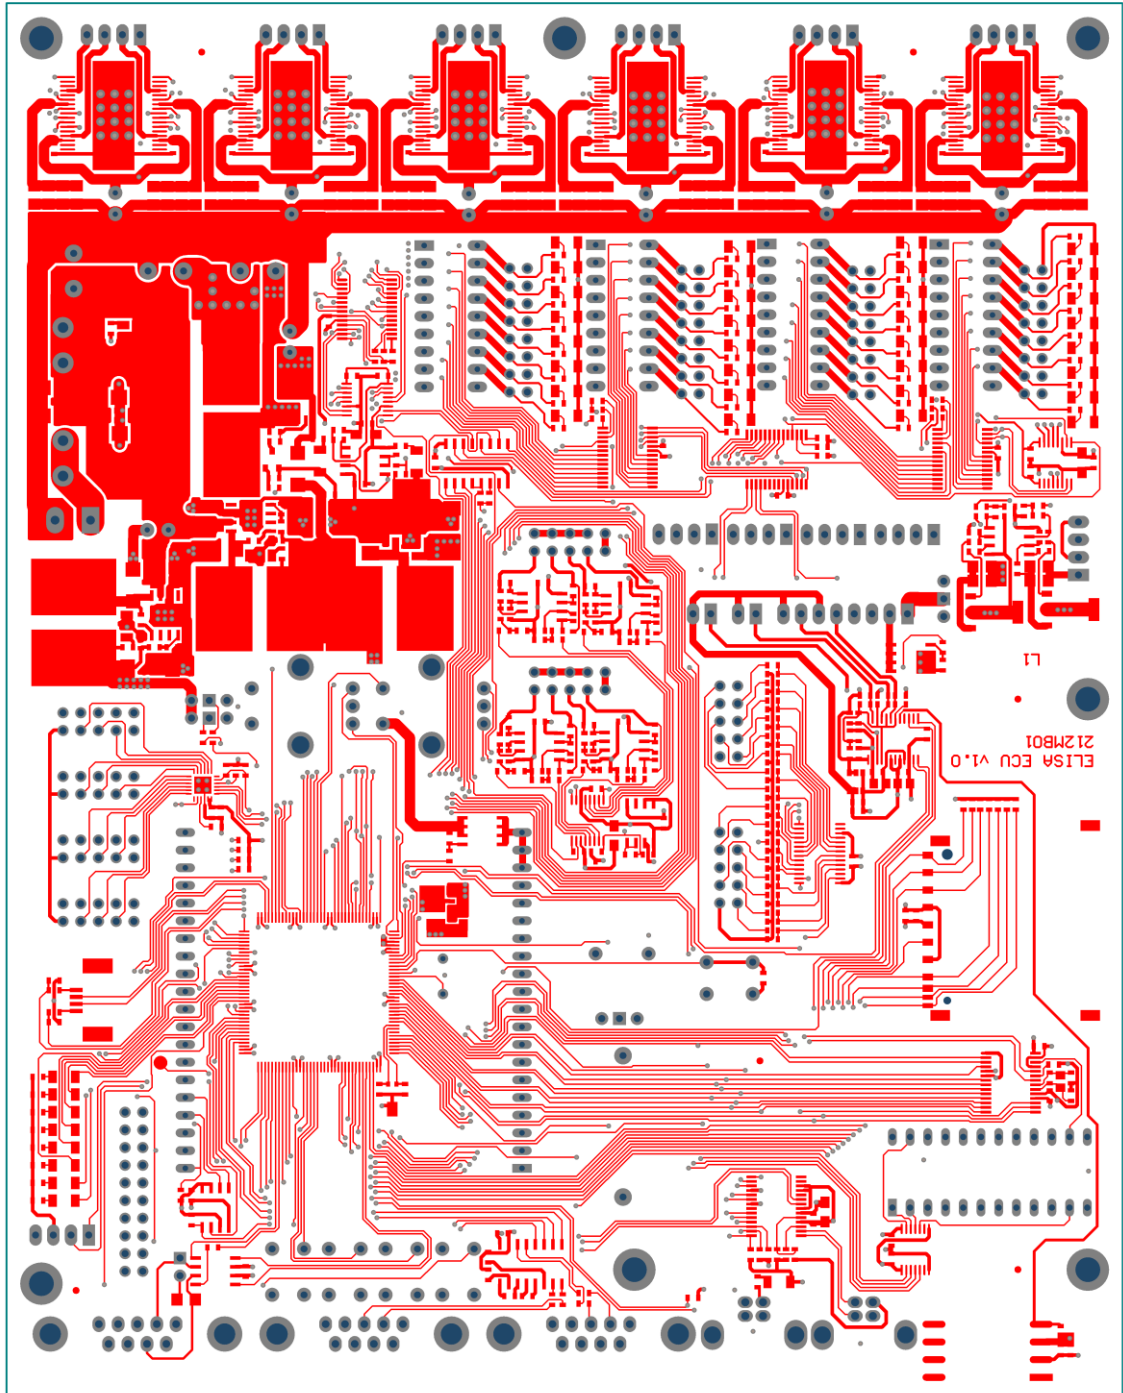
Control unit PCB layout – top layer (layer 1).
